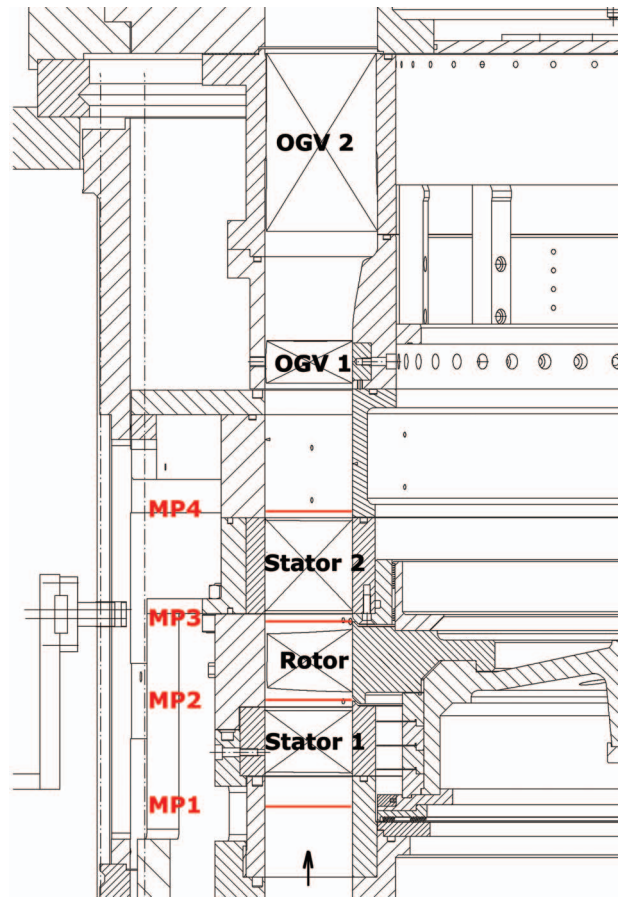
1.5-stage turbine section with probe measurement planes and tandem exit guide vane section
